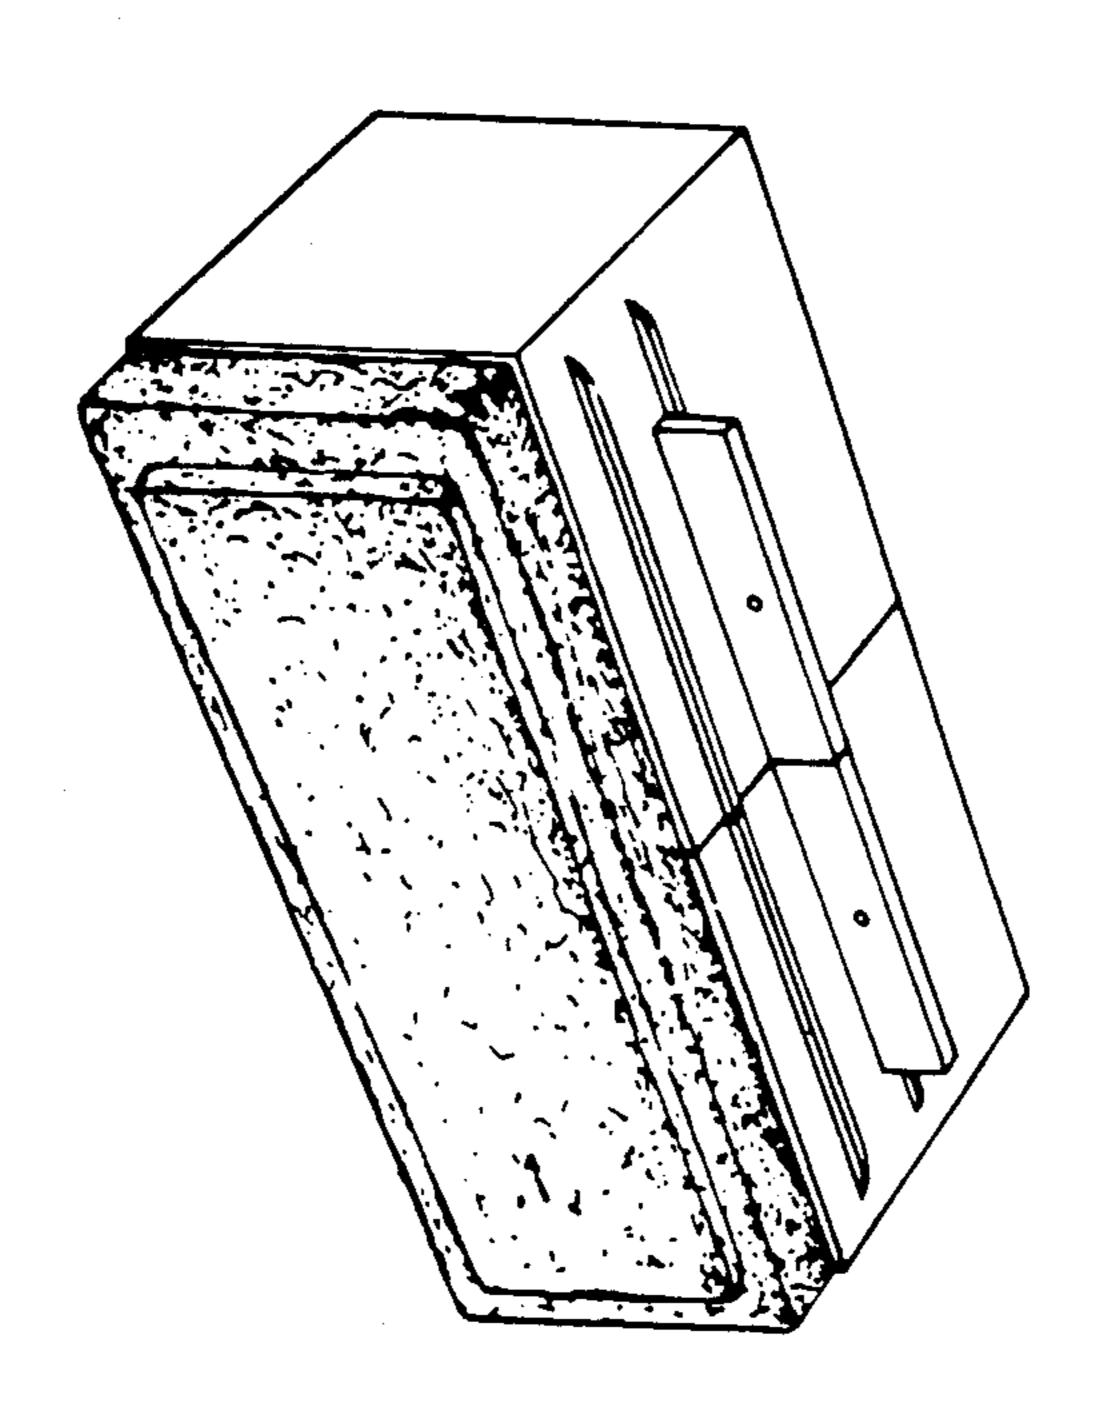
is a perspective view of a combined elastic frame and mold block for fireproof feed-through of electric cables or the like, showing my new design;
